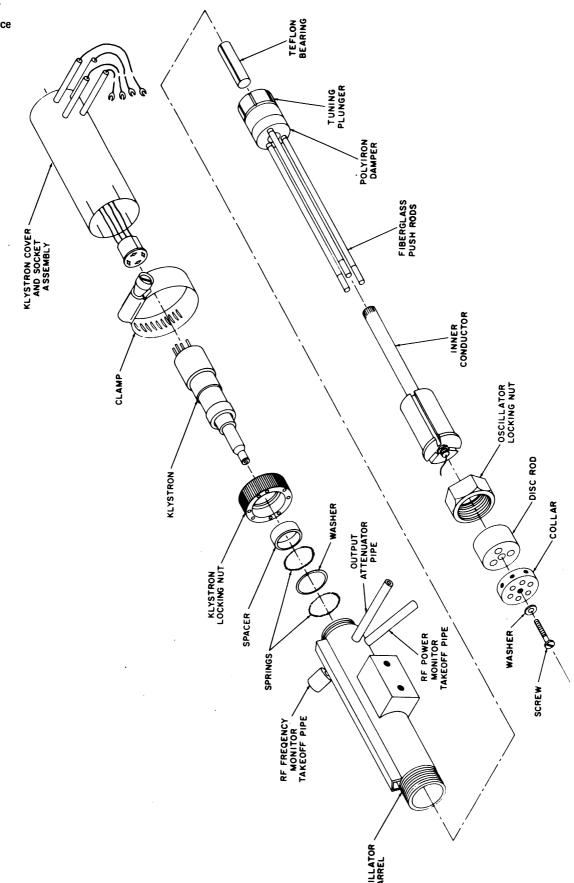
Klystron Cavity, Exploded View (Models 1107E and 1207E)
